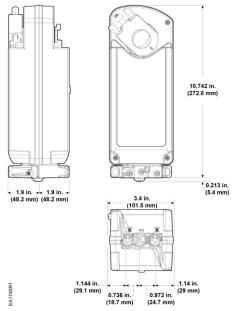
GVD/GKD Series Damper Actuator and Mounting Bracket Dimensions in Inches (Millimeters).
